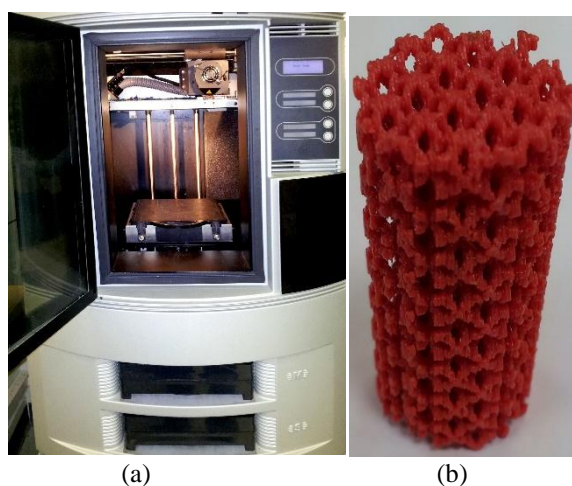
(a) 3-D printer Dimension Elite, (b) 3D sample fabrication by FDM process.
